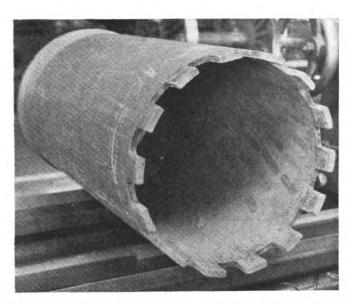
Chilled spots are cast on the inner surface of an inside smokestack extension to prevent cinder cutting
